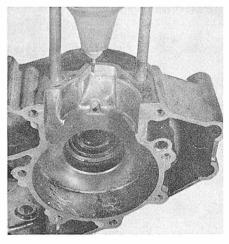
A—All bearings should be removed when correcting misalignment of passages. Make certain that all parts are completely cleaned before assembling.
